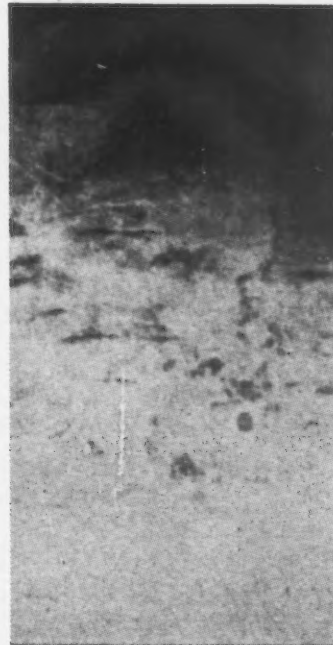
Second pass of the tank weld. Seam was preheated, and filler metal used.
